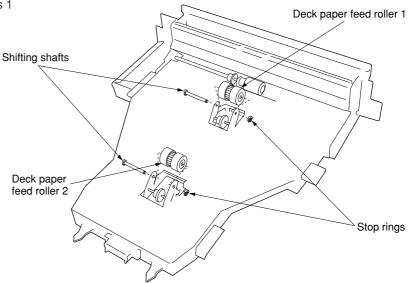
Detaching and refitting deck paper feed rollers 1 and 2
